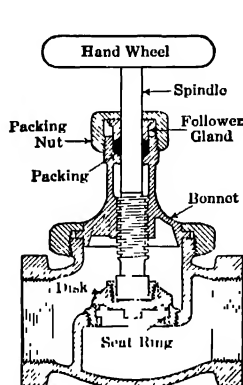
Typical Globe Valve, Screw-top, Inside-screw.
